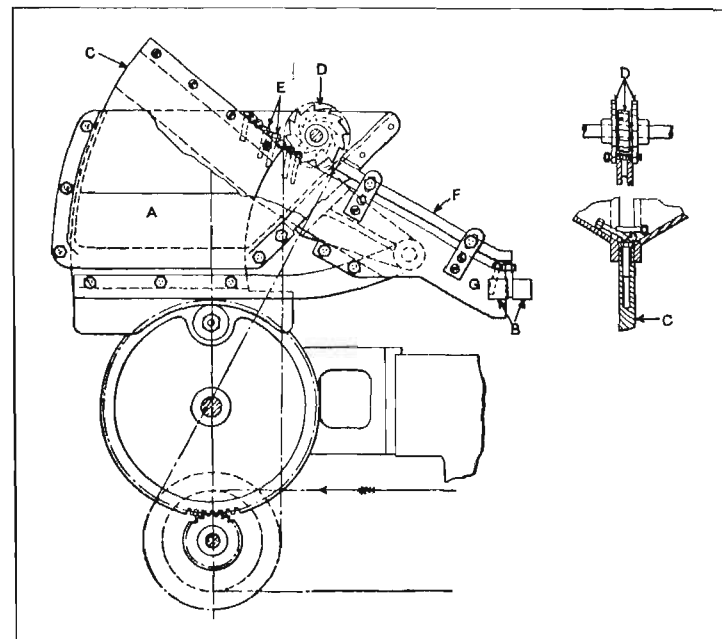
Hopper-feeding Mechanism for Screw Blanks
